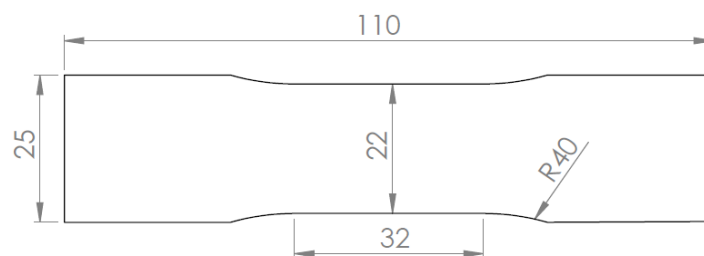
Specimen geometry used with the anti-buckling fixture for CT and TC tests in RD (dimensions in mm).
